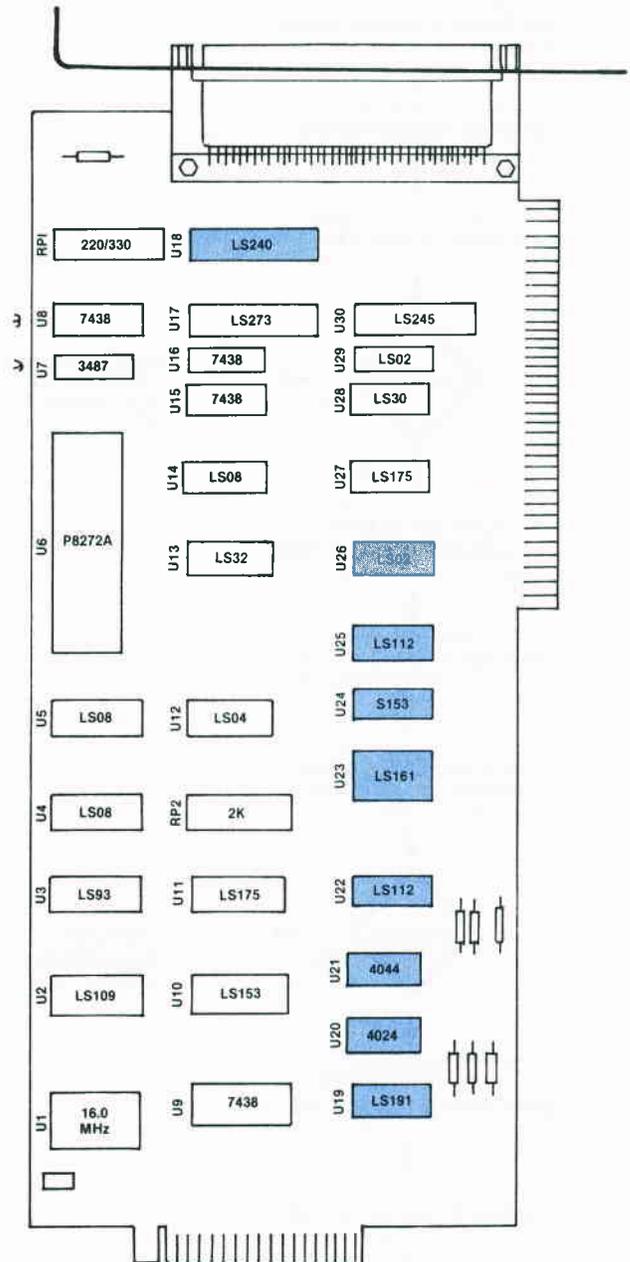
Chip location guide. This represents the IBM PC disk drive adapter card and is a guide to help you find the chips of interest.
